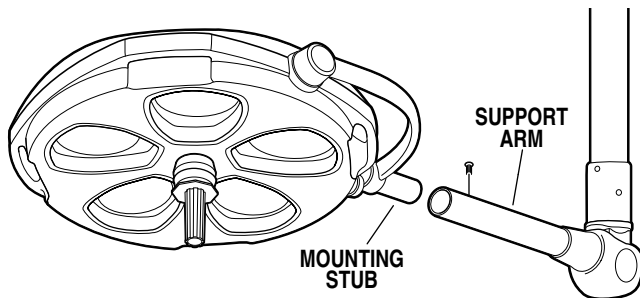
Model 23 or 19 Lighthead Installation (ST23 Lighthead shown)
